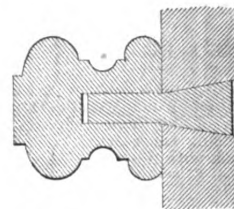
Full Size Section of Knob, Showing Manner of Fastening.
